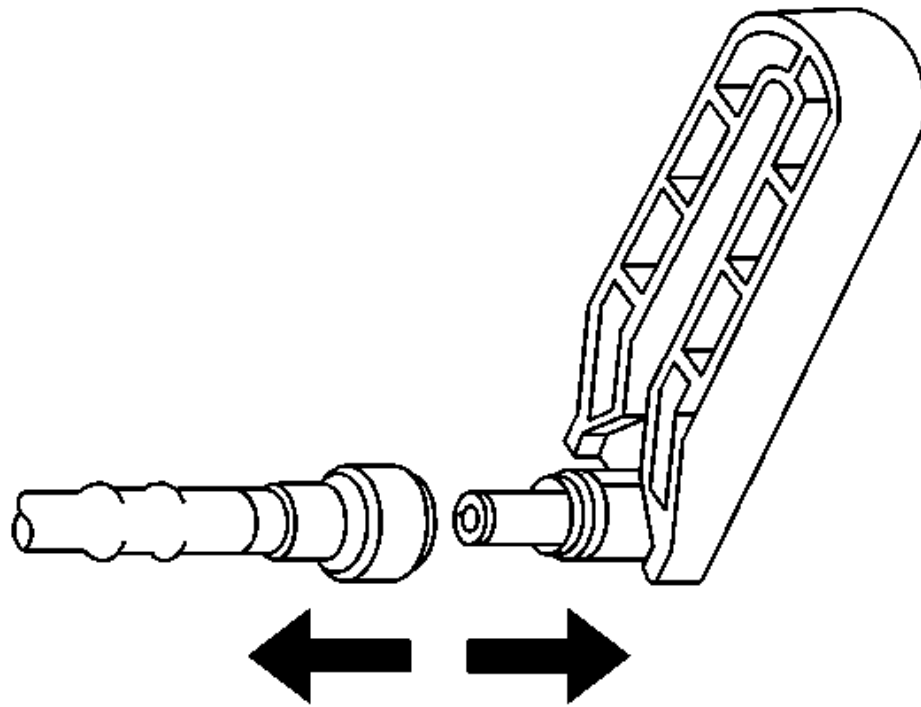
View Of Quick Connect Locking Tabs (Metal Collar)
